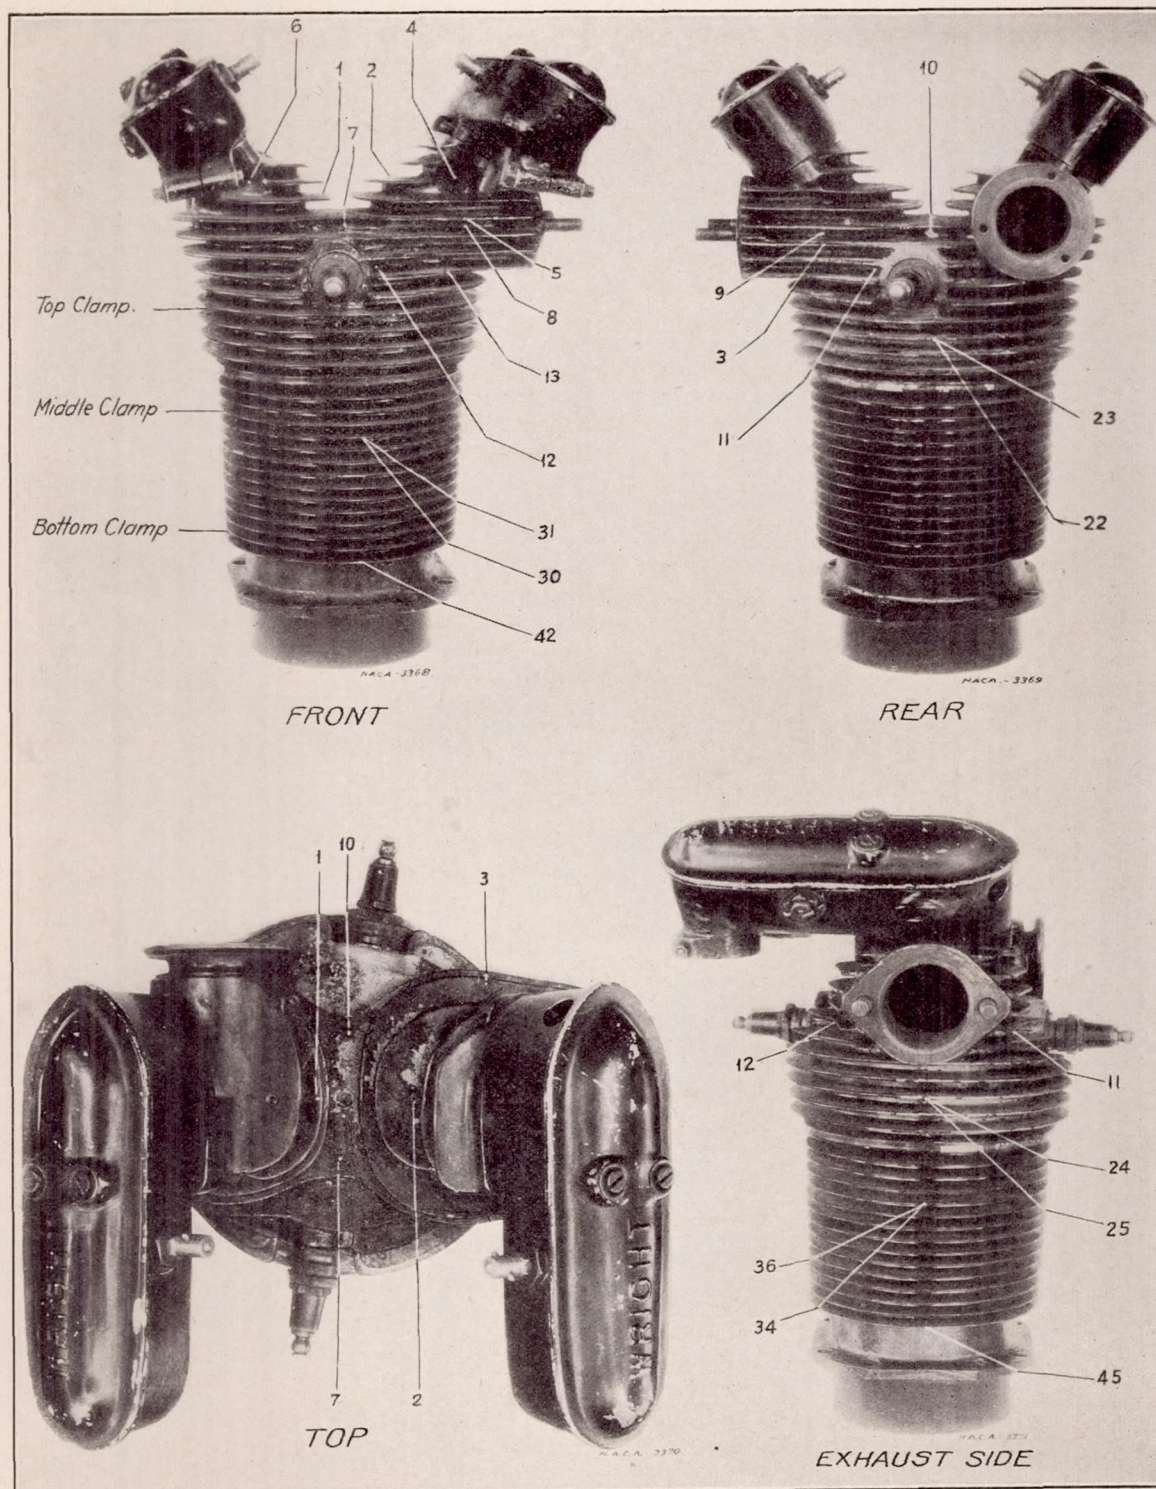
Location of thermocouples on head and fins of cylinder No. 1
